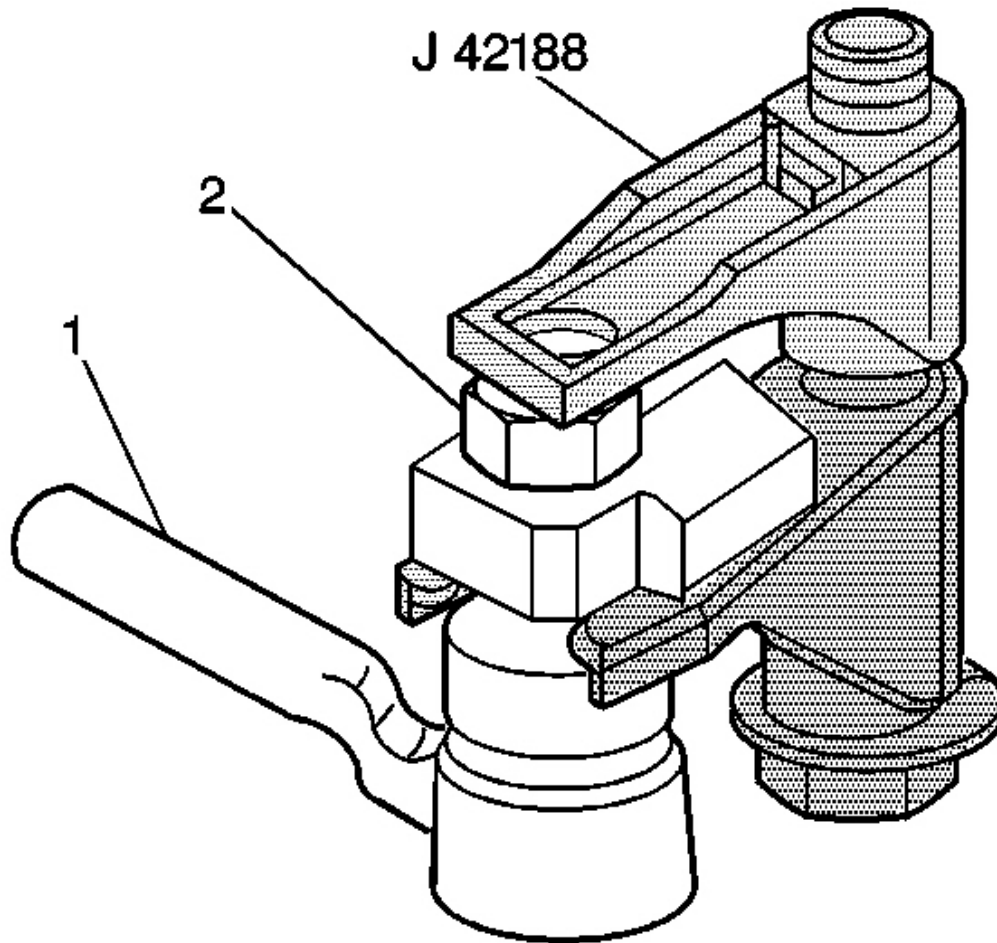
J 42188, Steering Knuckle & Lower Control Arm Ball Stud
